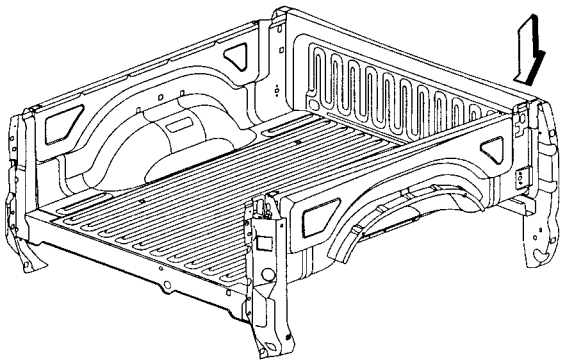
WELD NUT - SHORT CARGO BOX ONLY - SHORT CARGO BOX ONLY
